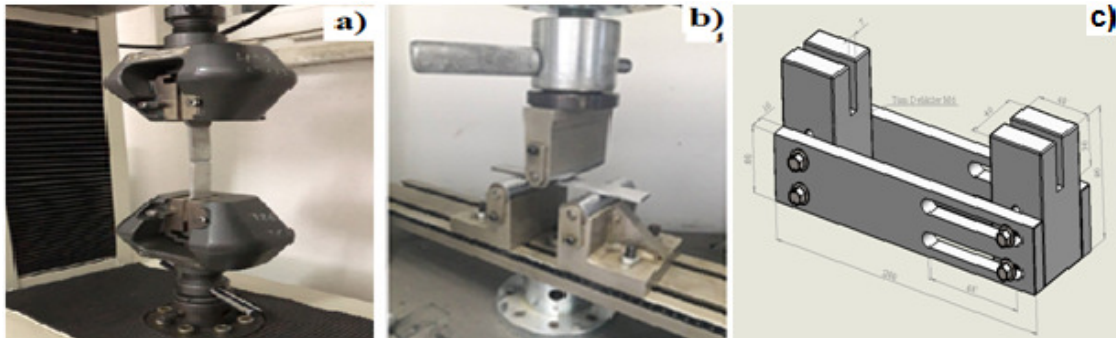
a) Tensile test, b) three-point bend test c) holding mold
